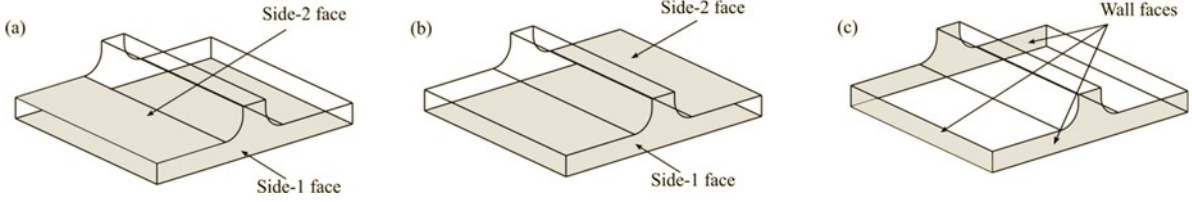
(a) face pair 1; (b) face pair 2; (c) wall faces for face pair 1
